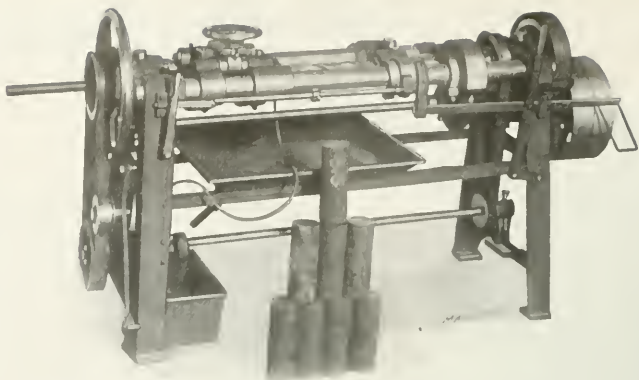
Special Grinding Machine for sharpening Chasers of Threading Dies
